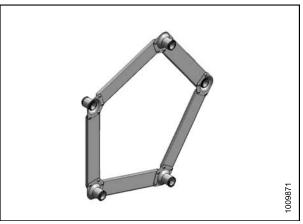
Five-Bat Reinforcing Kit Shown – Six-Bat Reinforcing Kit Similar
